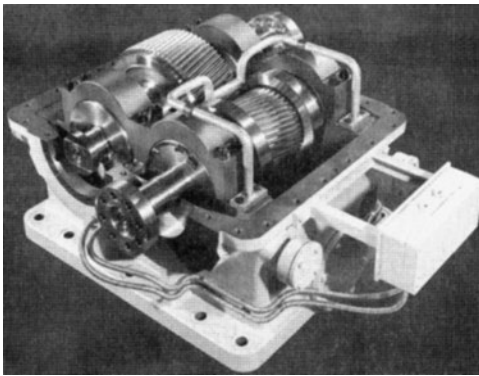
Single-helical gearset designed for high speed and high horsepower. (Courtesy of Maag Gear Wheel Company, Zurich, Switzerland.)
